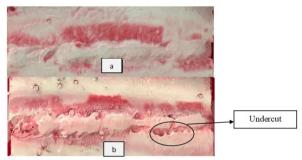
Penetrant Test Results for Tensile Test Specimens (a) 60A, (b) 80A
